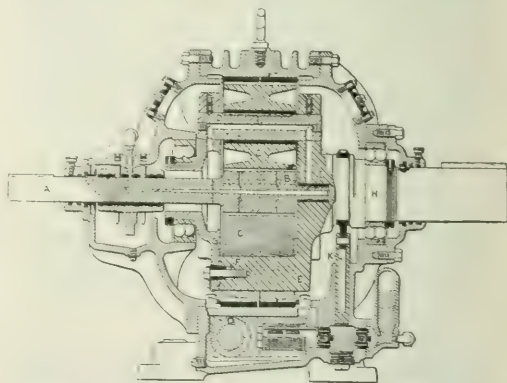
SECTIONAL ELEVATION OF TURBO GEAR.
